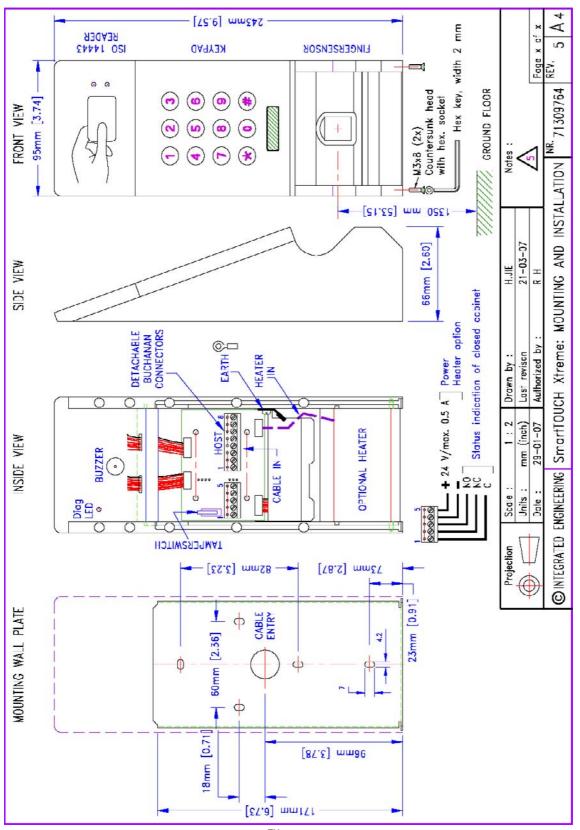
Drawing 71309764, SmartTOUCH™ Xtreme: mounting and installation
